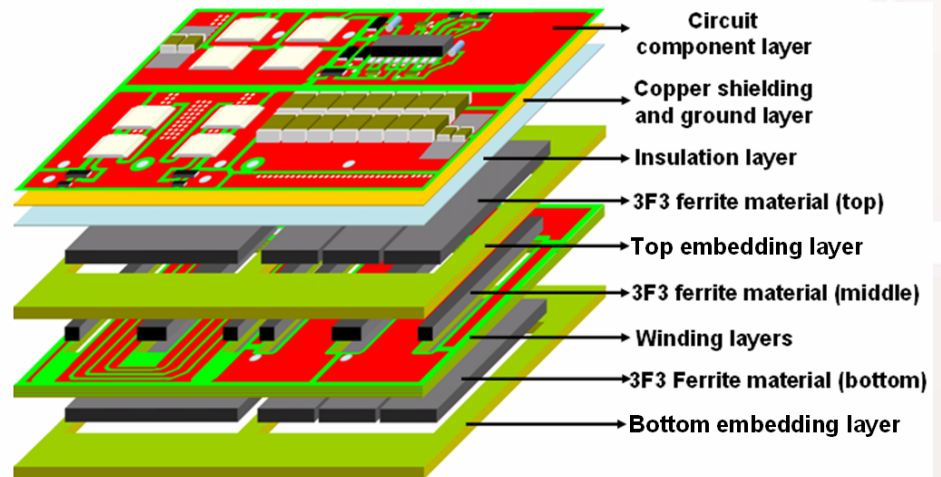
Converter with printed circuit board integrated transformer for 16 galvanically isolated outputs.
